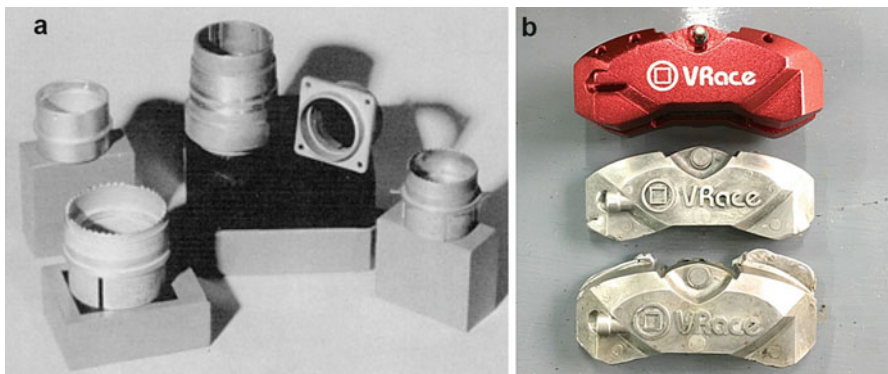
(a) Electrical connectors produced from wrought alloy 6262 [8], (b) Brake caliper for motorcycle, cast from 6061-T6, color anodized (courtesy of GISSCO Co., Ltd, Thailand)
